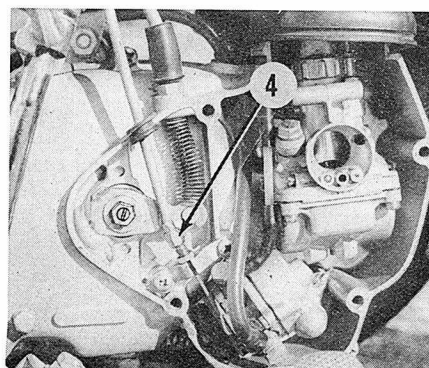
Oil injection control cable is adjusted at (4). Refer to text.
